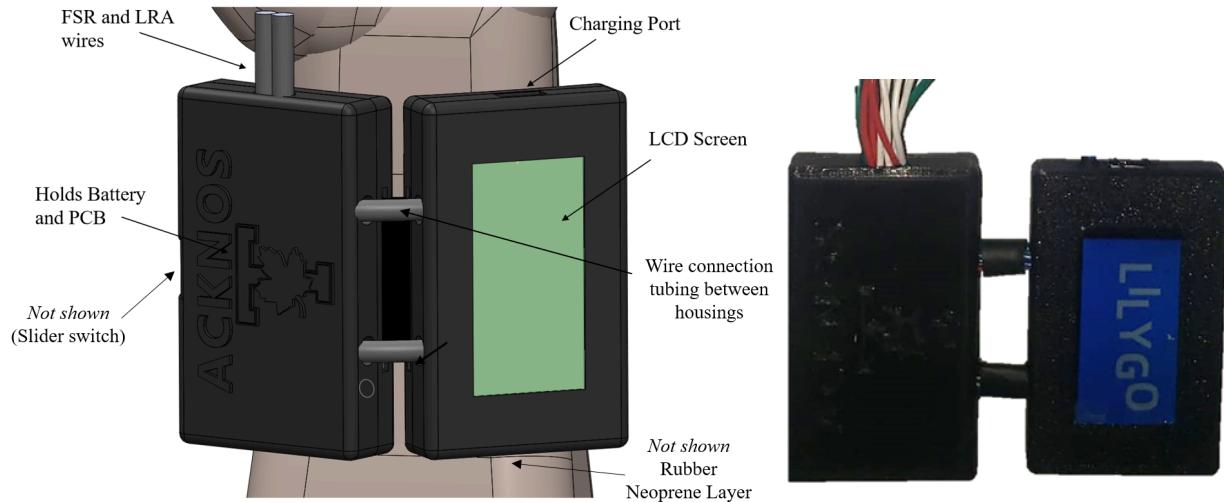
Final Electrical Housing Design (CAD model left, Physical right)
